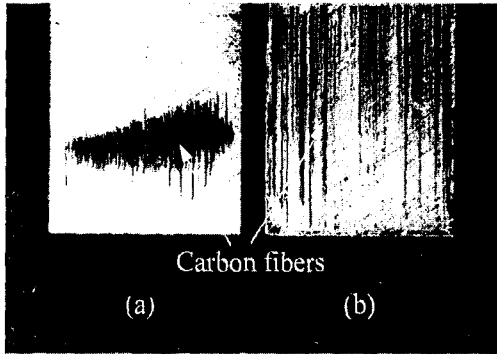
Photograph of the typical failure surfaces obtained from the failed tensile test specimens. (a) Co-cured single lap joint; (b) co-cured double lap joint.
